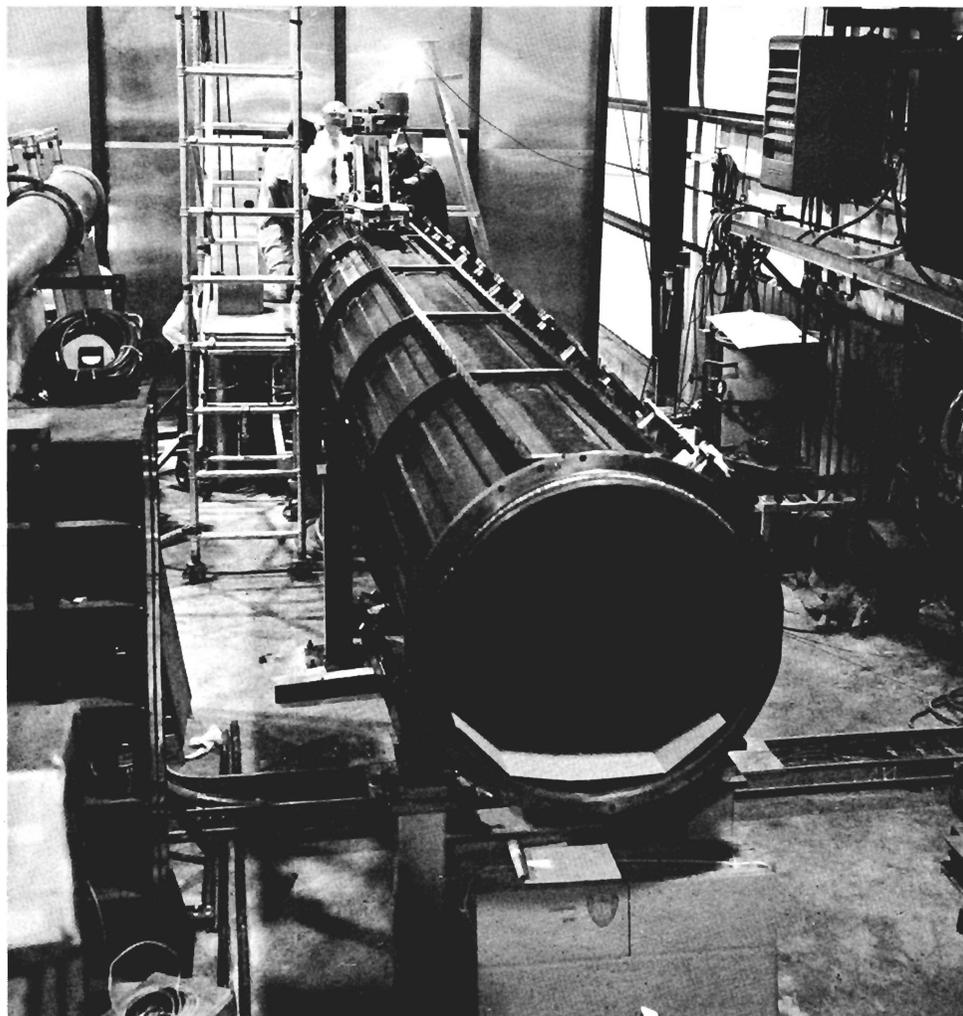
The 10-MeV Prototype linac tank. Dwayne Leifheit, John O'Meara, and Richard Lepszky are at the low-energy end, working on machining drift-tube holes. The portable drilling rig can be seen in front of them.
